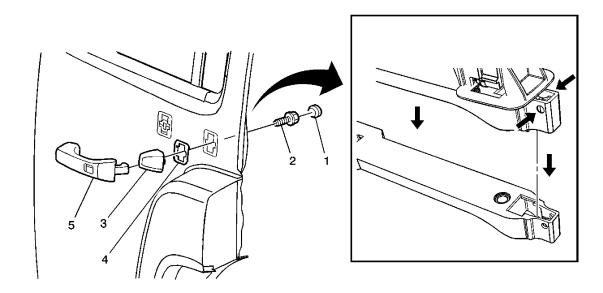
Door Handle Replacement - Rear Outside Courtesy of GENERAL MOTORS CORP.
